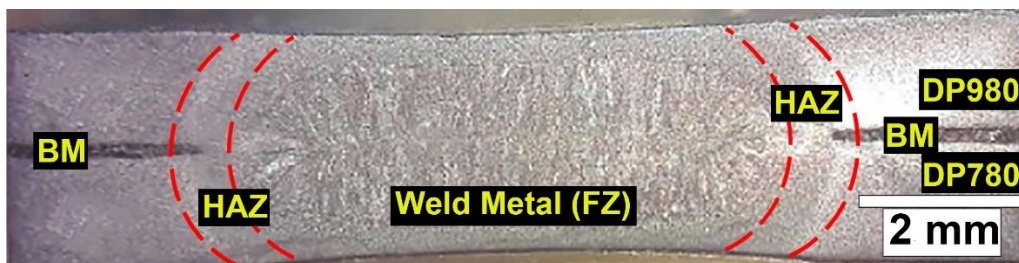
Macrostructure of DP780/DP980 RSW joint welded at 10 kA.
